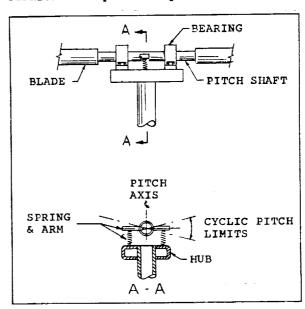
Balanced-pitch rotor having two blades and fixed collective pitch.
